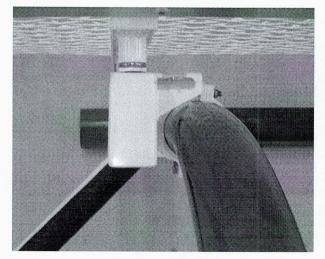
Beam Adjustment, Step 1 - Shim Rear Beam
